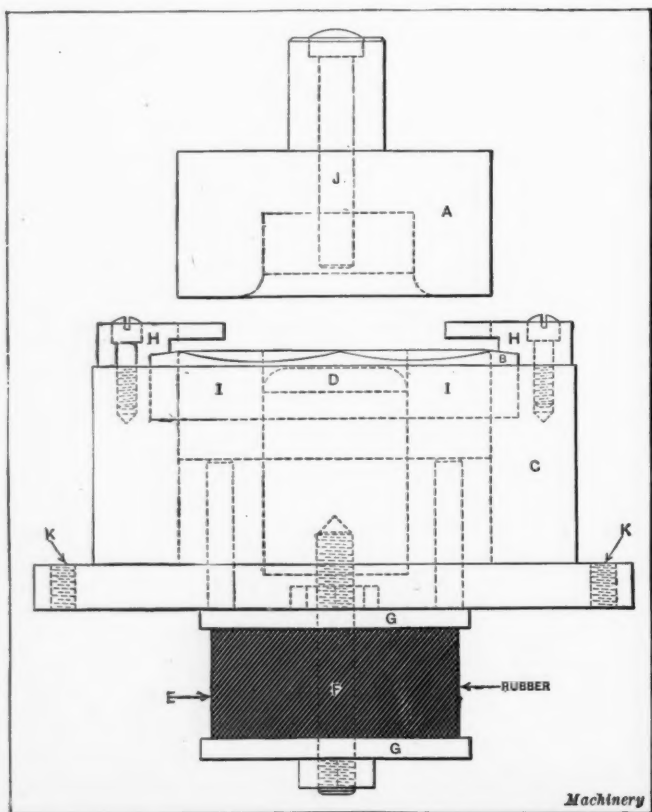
Compound Blanking and Drawing Die in which First Operation is performed
